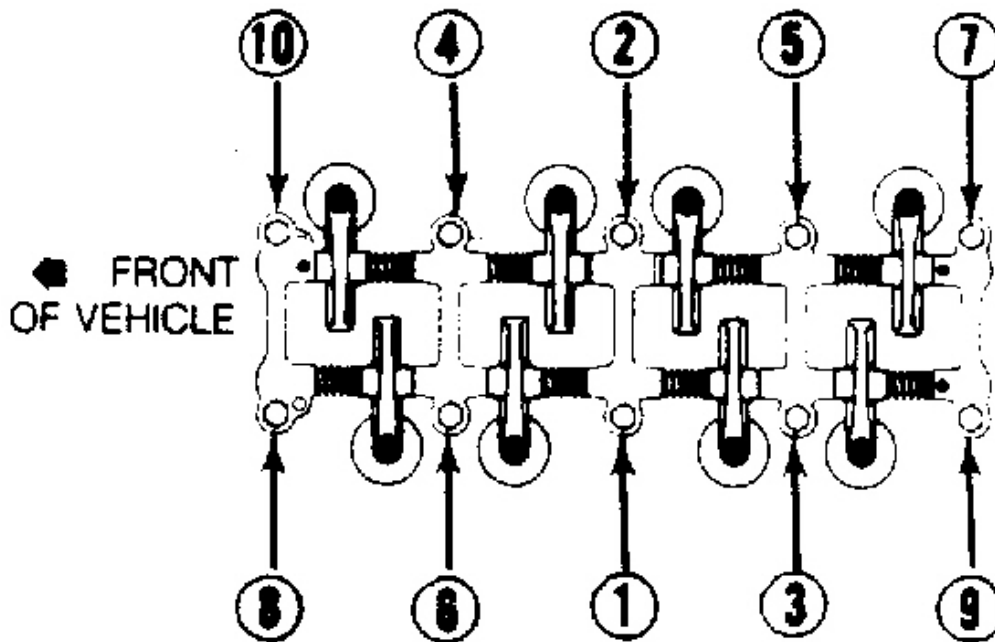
Cylinder Head/Rocker Arm Bolt Tightening Sequence
